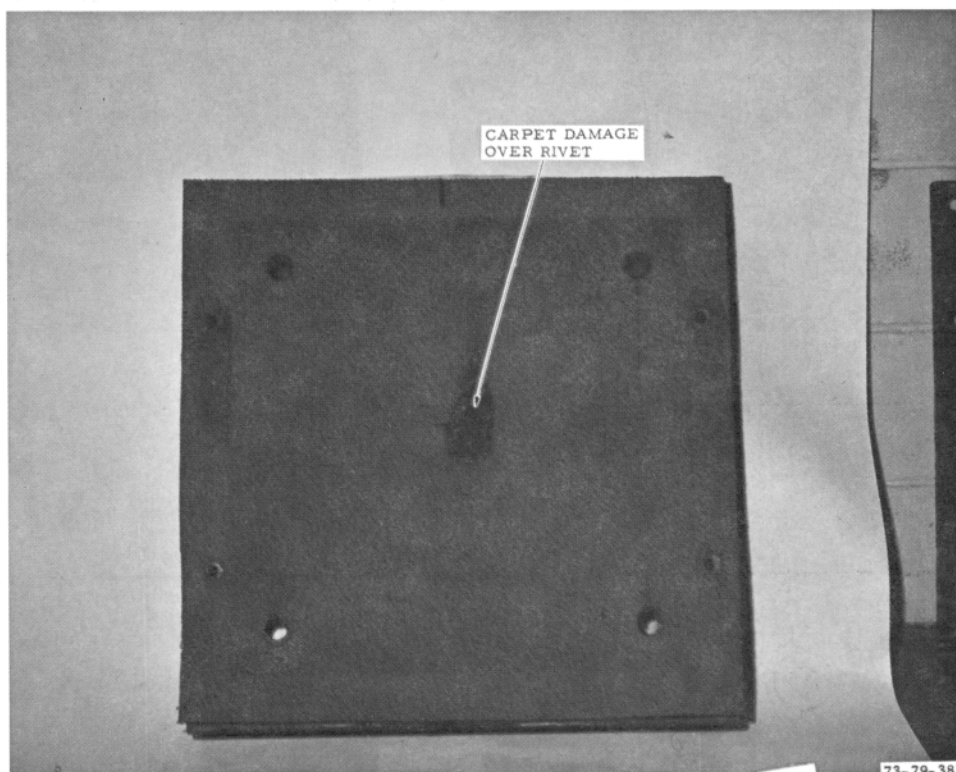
EXTERIOR CONFIGURATION OF THE MODIFIED FLOOR TEST PANELS
